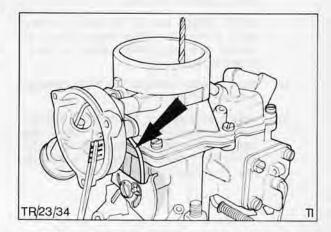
'V' mark setting adjustment carried out by bending control rod shown
